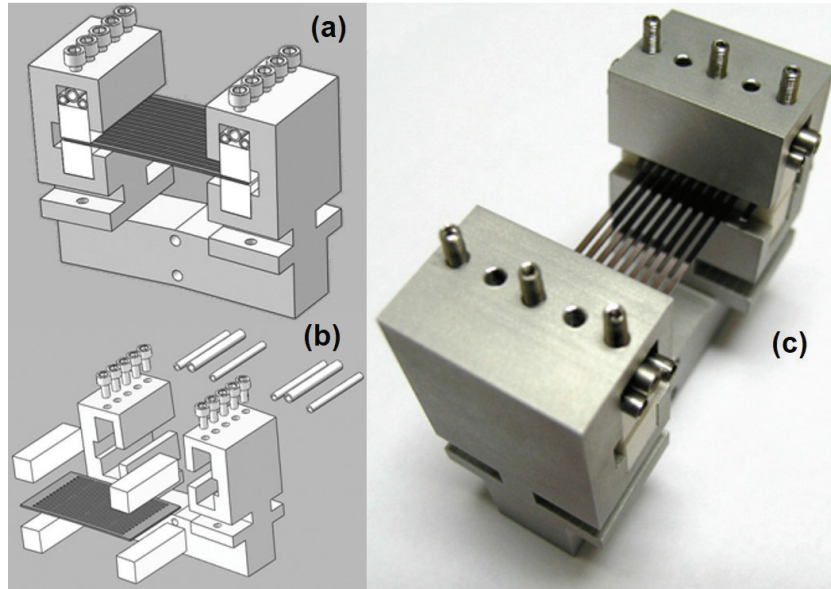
Schematic view of a multi-strip crystal assembled on its holder(a), exploded view of the holder and crystal assembly (b), and photo of multi-strip mounted in the holder (c). Adapted from Ref. [88].
